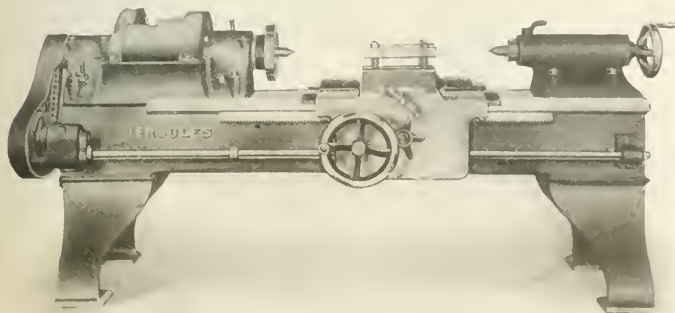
Himoff Single-purpose Lathe equipped with Cone Pulley and Back-gears
